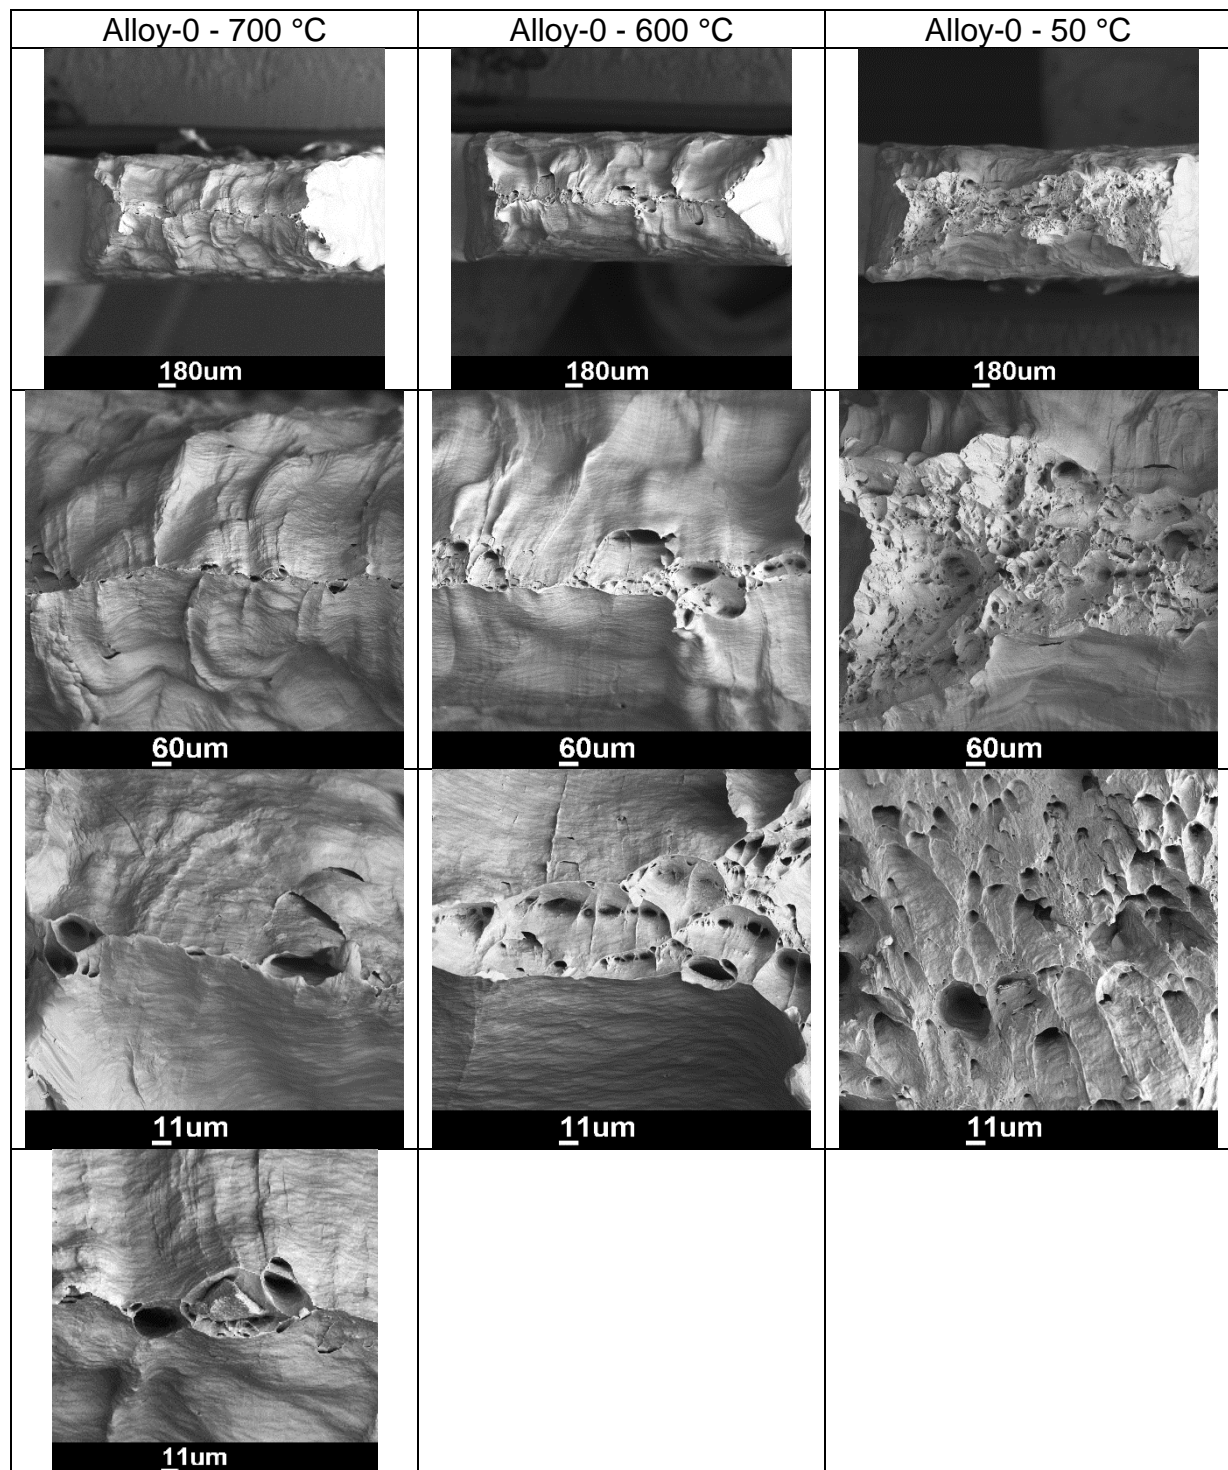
Fracture surface at 700, 600 and 50 °C, Alloy-0
